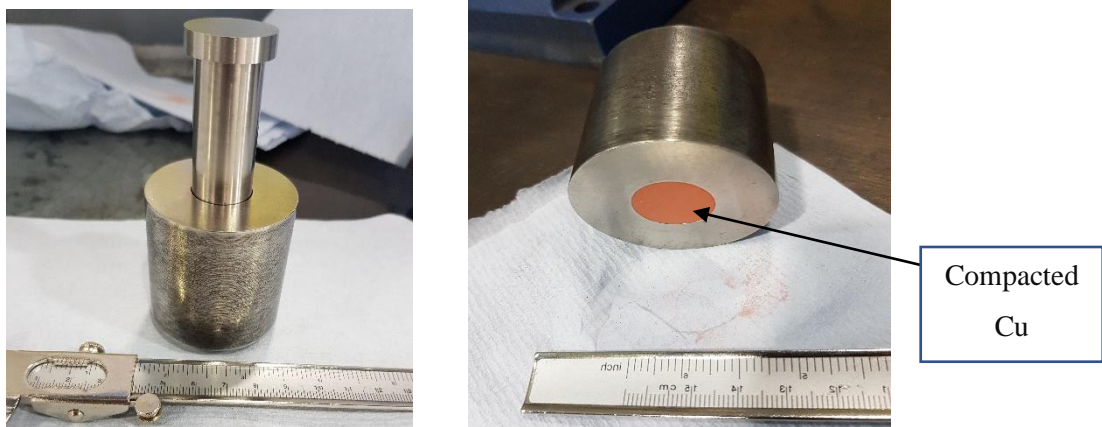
; Mould die for (a) Compaction and Sintering (C&S) method (b) (a) Mould die set, (b) after the compaction process
